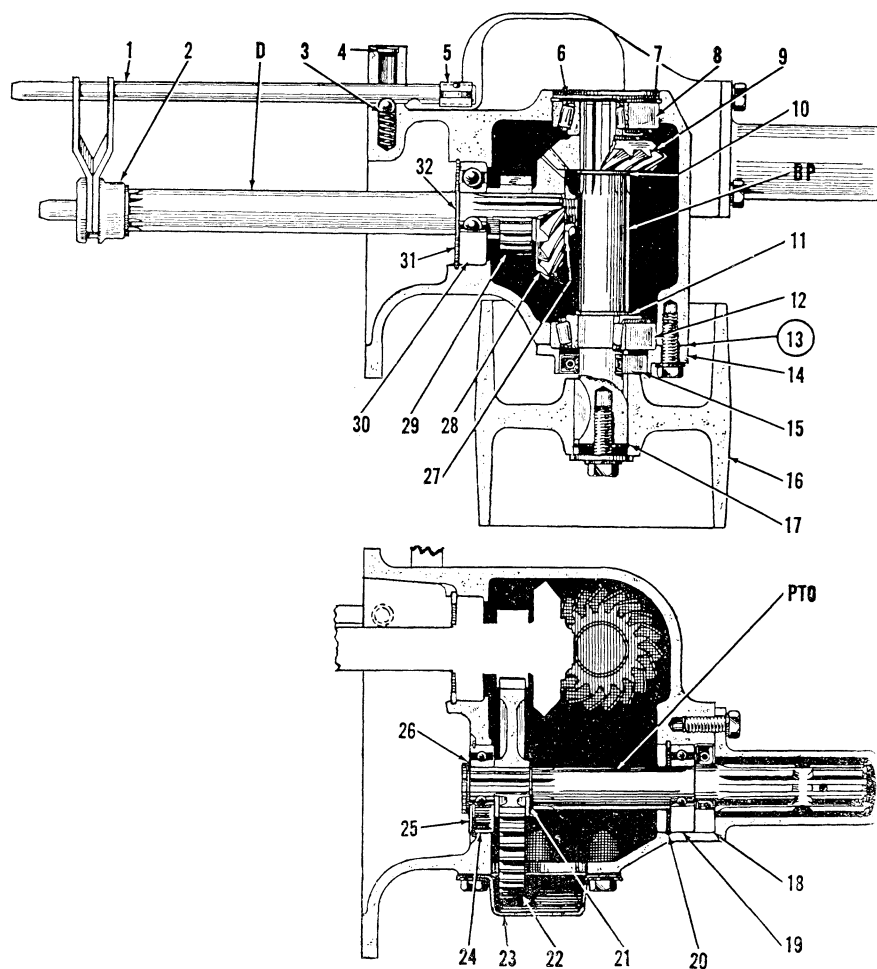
Pony combination belt pulley and power take-off unit. Drive shaft (D) pilots in bushing in rear of transmission input shaft and coupling (2) engages splined end of input shaft to drive the unit. Shims (13) are for adjustment of pulley shaft bearings.
